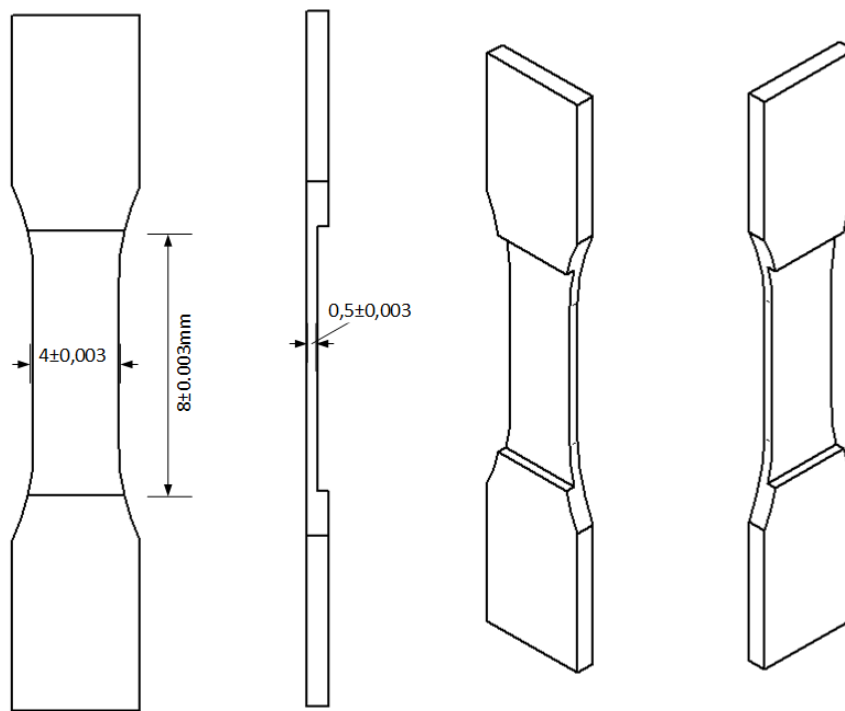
Schematic drawing of a tensile test specimen geometry. The tensile specimen has an abnormal geometry with the target area machined down 0.5mm. The dimensions are width of 4mm, length of 8mm and thickness at 0.5mm. The radius is 10° and the heads are 1mm thick.
